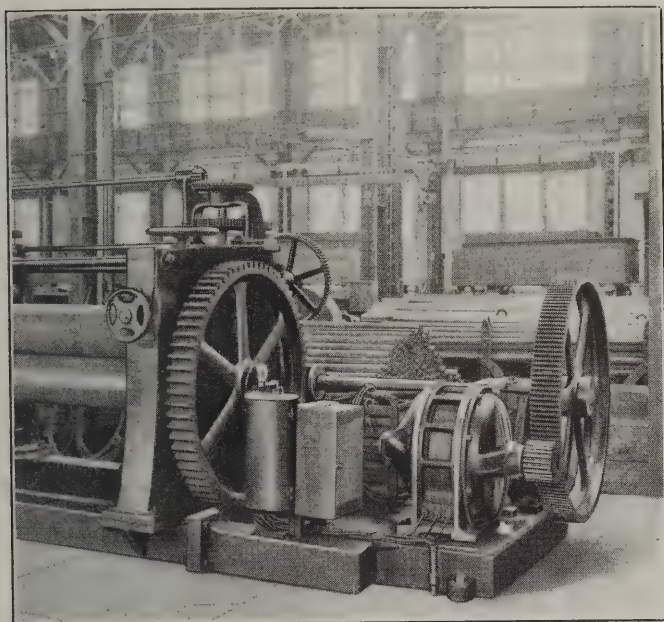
Straightening Rolls Driven By a Wound Rotor Having Drum Type Control
